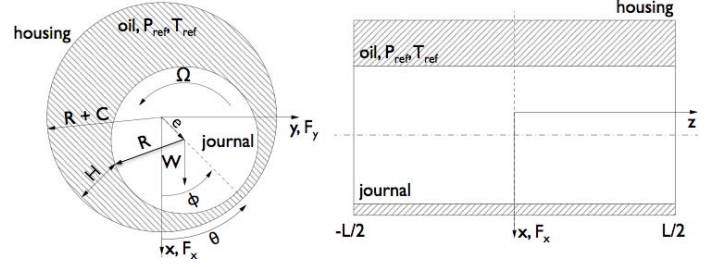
SCHEMATIC DRAWING OF A JOURNAL BEARING.
